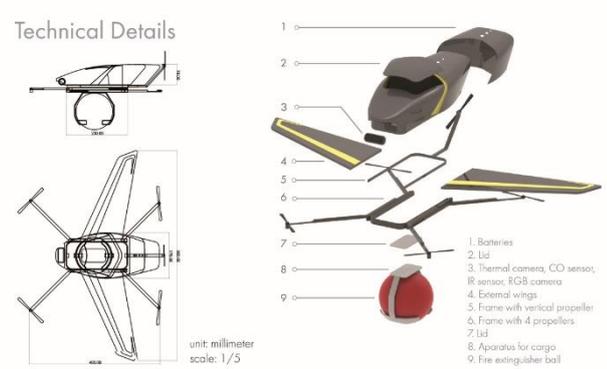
Technical representation example, section drawing and exploded render (Student 6)
